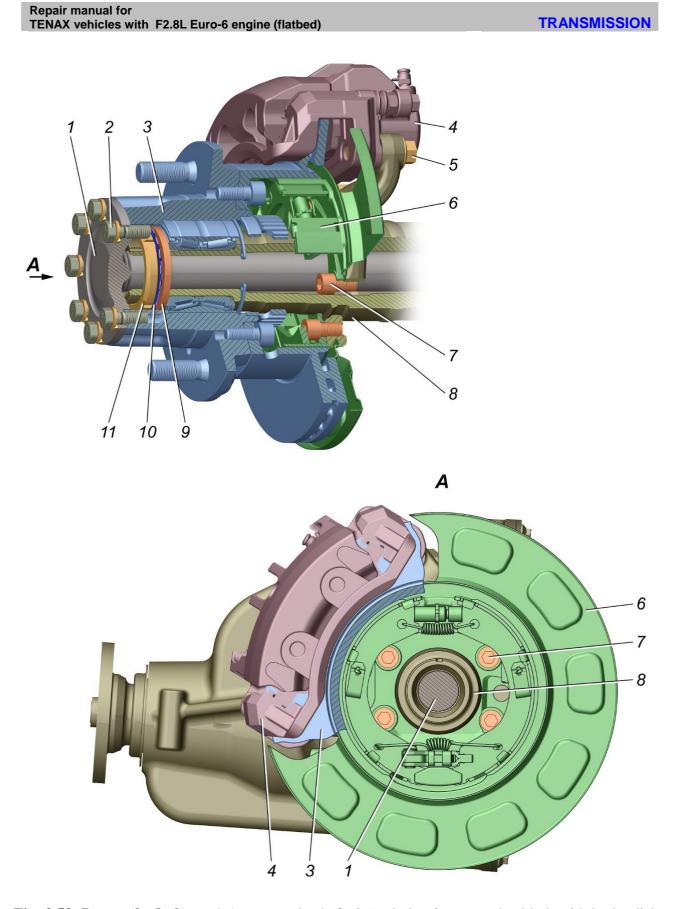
Rear axle (hub part) 1 - rear axle shaft; 2,5 - bolts; 3 - rear wheel hub with brake disk and bearing; 4 - left disk brake; 6 - left parking brake; 7 - screws; 8 - axle shaft casing 9 - thrust washer; 10 - lock washer; 11 - slotted nut.
